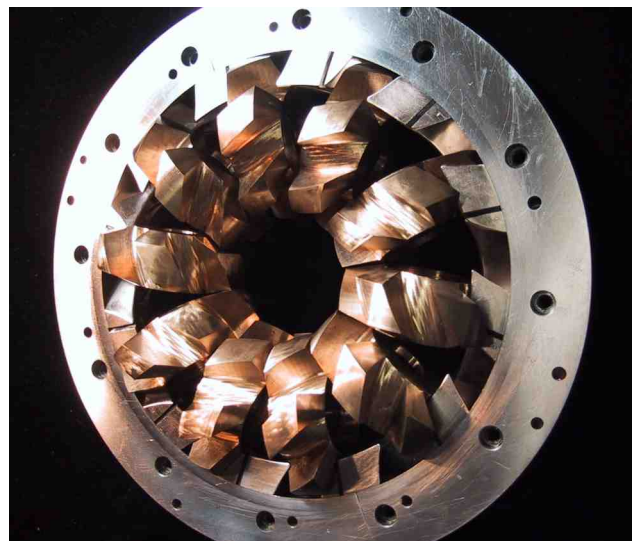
Partially Assembled First Generation TIVM Compressor/Expander Prototype
